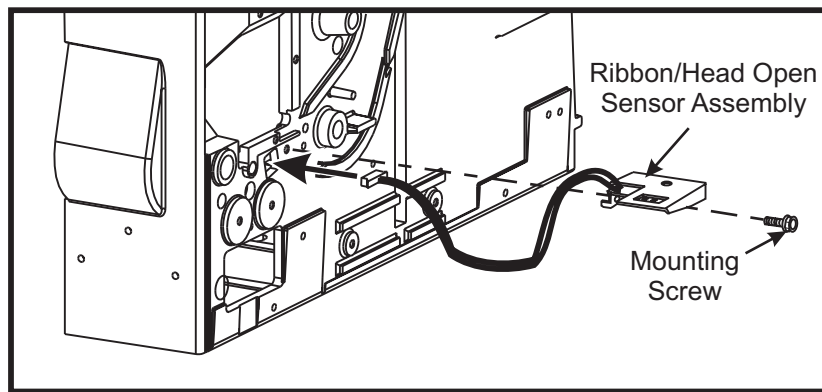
Ribbon/Head Open Sensor Assemble and Disassemble
